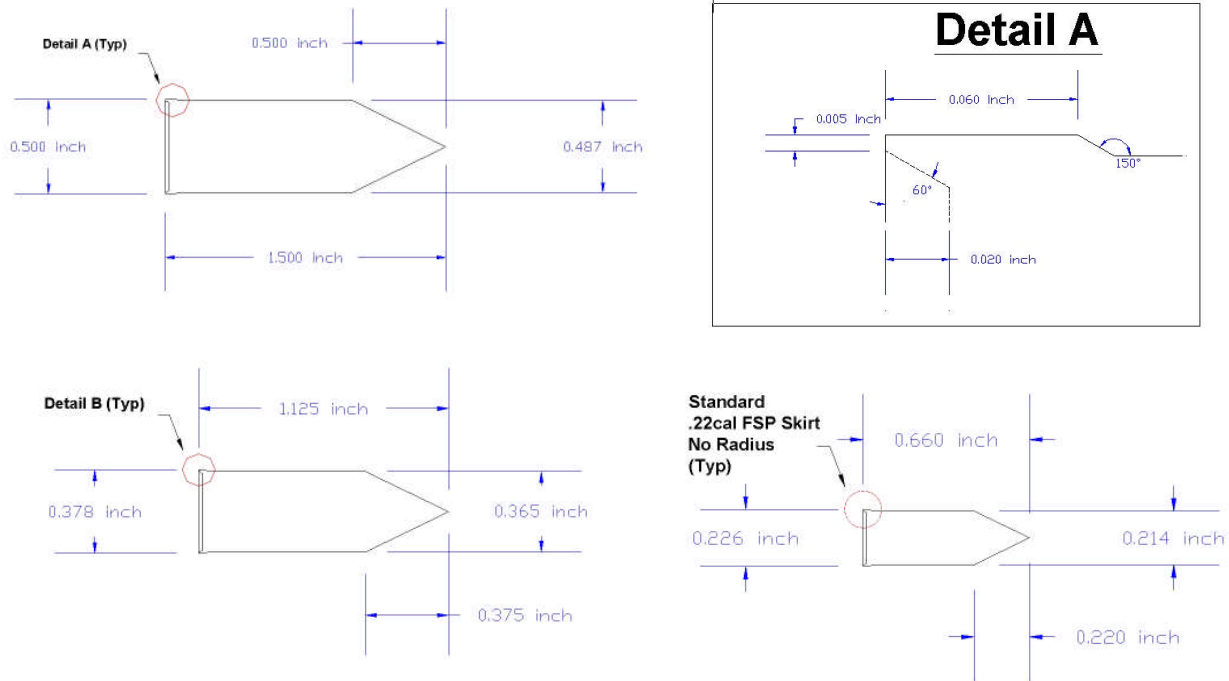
Machine drawings for projectiles (upper left: 0.50 cal; lower left, 0.375 cal; lower right, 0.22 cal. The upper right drawing (Detail A) provides details on the skirt that engages the rifling.
